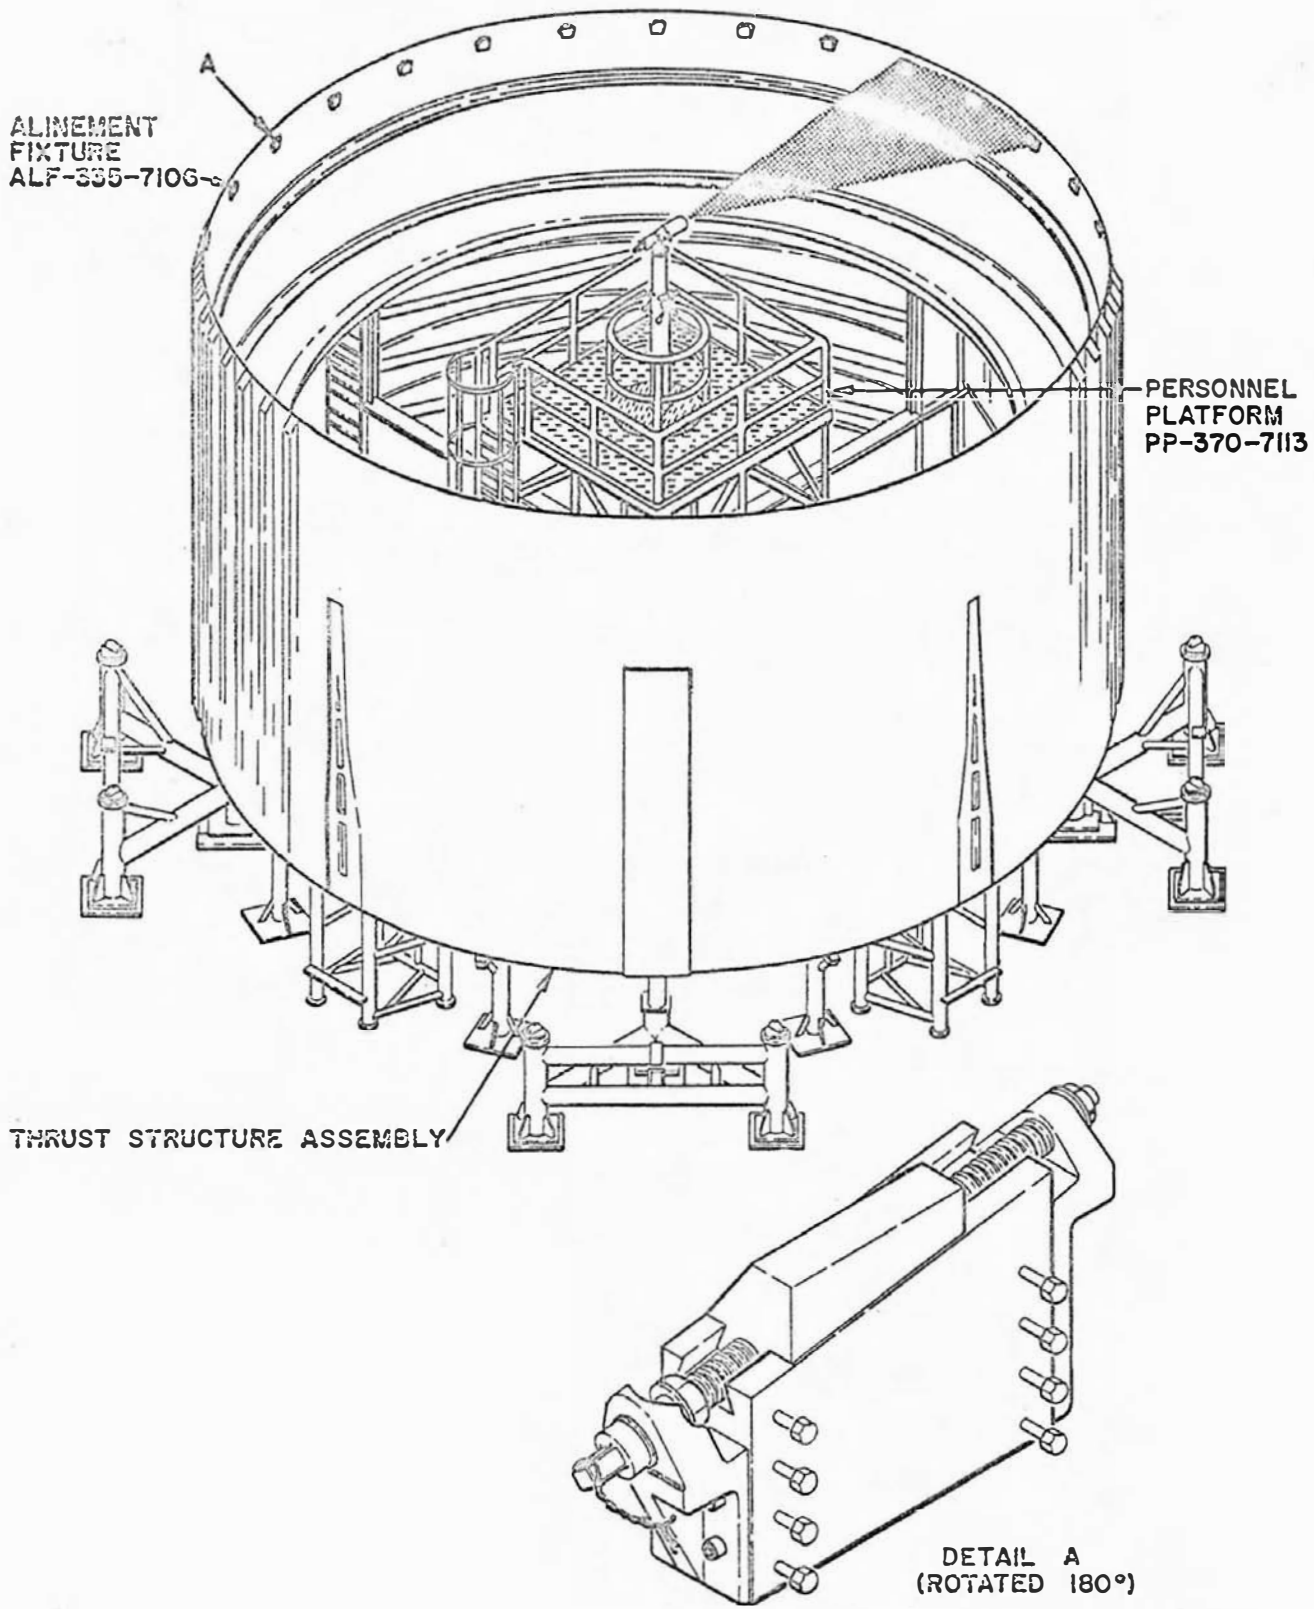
Checking Alinement of Alinement Fixtures ALF-335-7106
